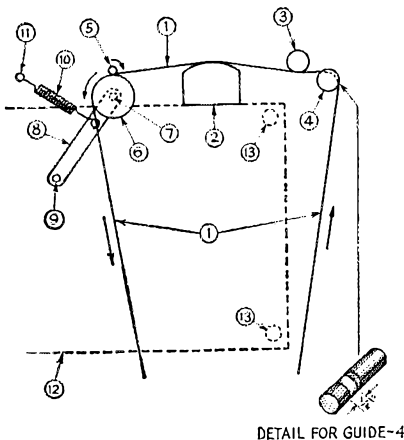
Sketch showing details of the tape deck. Capstan (5) is driven by mechanism shown in Figs. 3 and 4.
